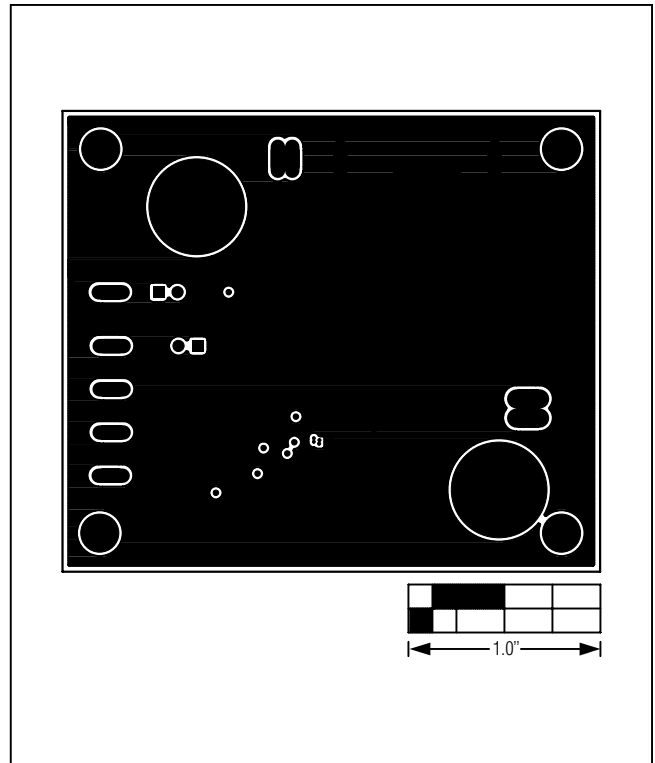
MAX15112 EV Kit PCB Layout—Inner Layer 2
